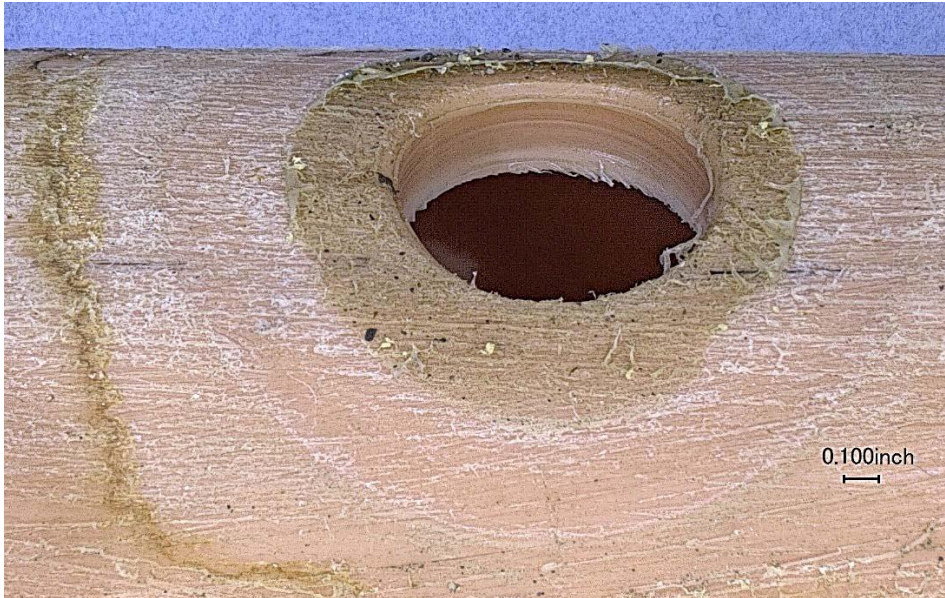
Photograph of the exposed outer top surface of the main after disassembly of the tee showing the pierced hole made by the cutter tool. Note the fine circular cut marks within the pierced hole and the absence of threads.
